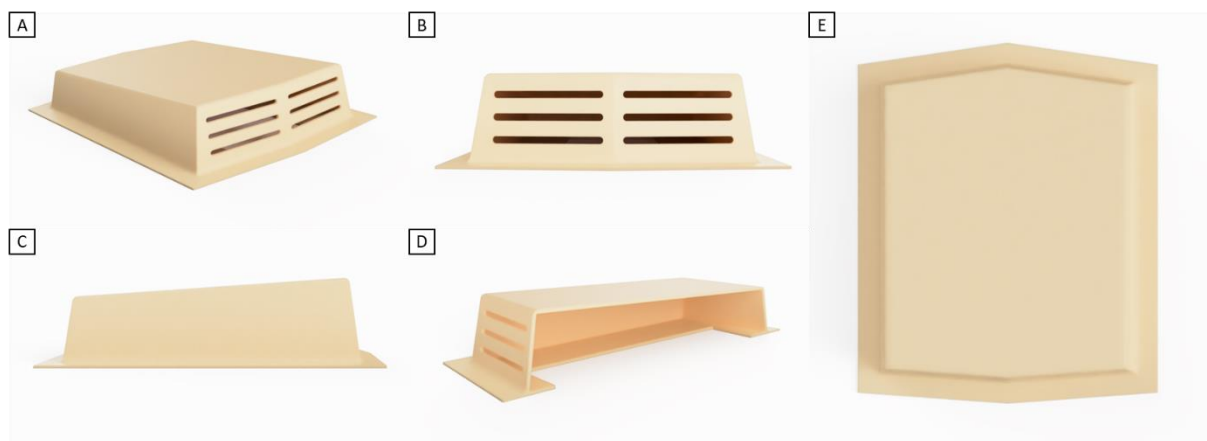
6 Concept 1 Isometric View (A), Front View (B), Right View (C), Cross-Section View (D), Top View (E)
